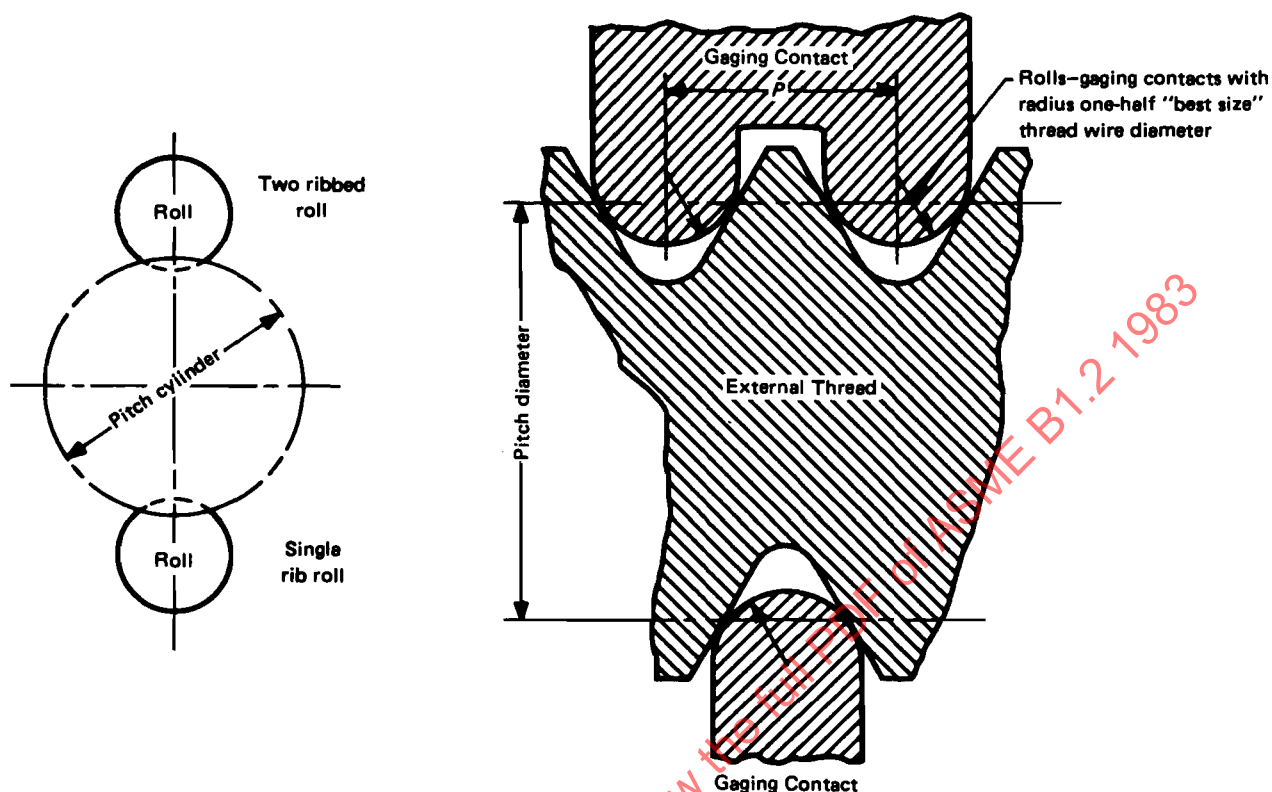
THREAD SNAP GAGES — MINIMUM-MATERIAL THREAD GROOVE DIAMETER LIMIT
